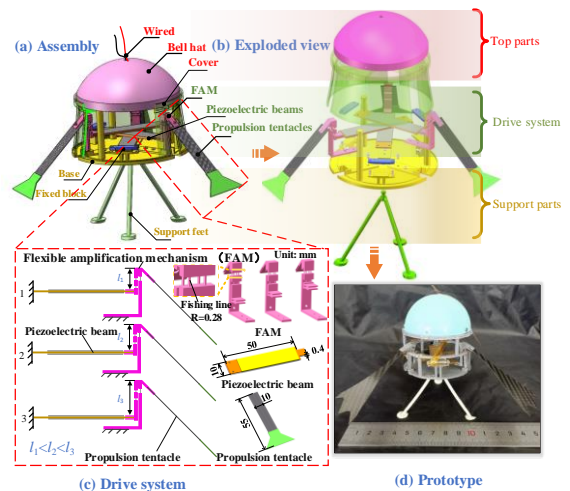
The configuration of the bionic robotic jellyfish. (a) robotic jellyfish assembly; (b) exploded view; (c) drive system; (d) the prototype.
